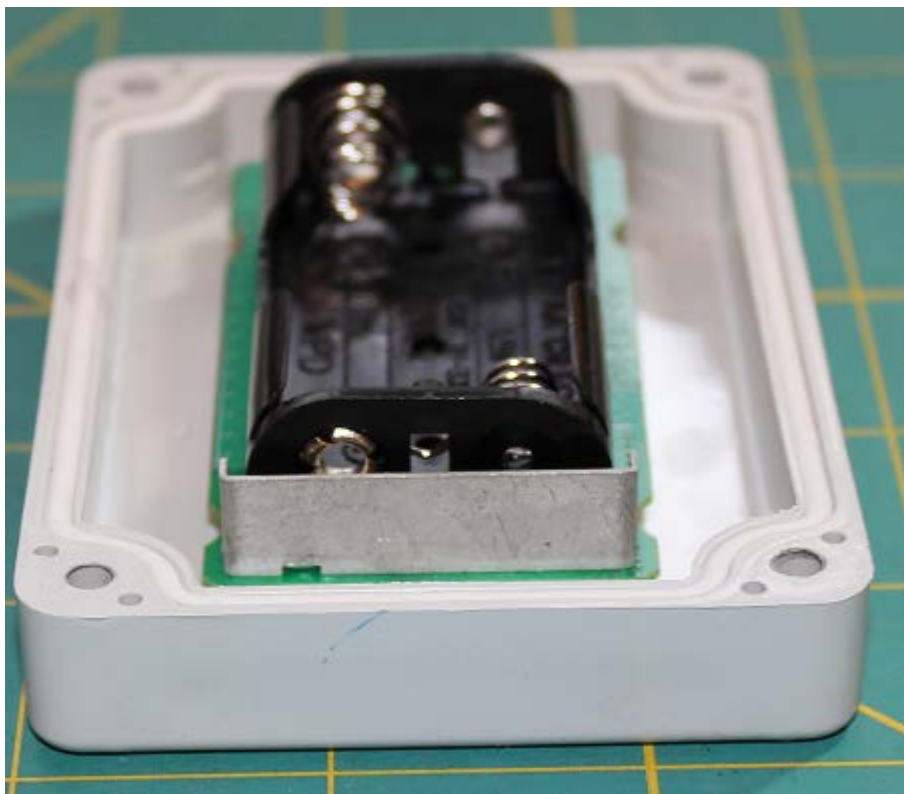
Inside of Top Cover, showing double sided sticky tape mounting mechanism
